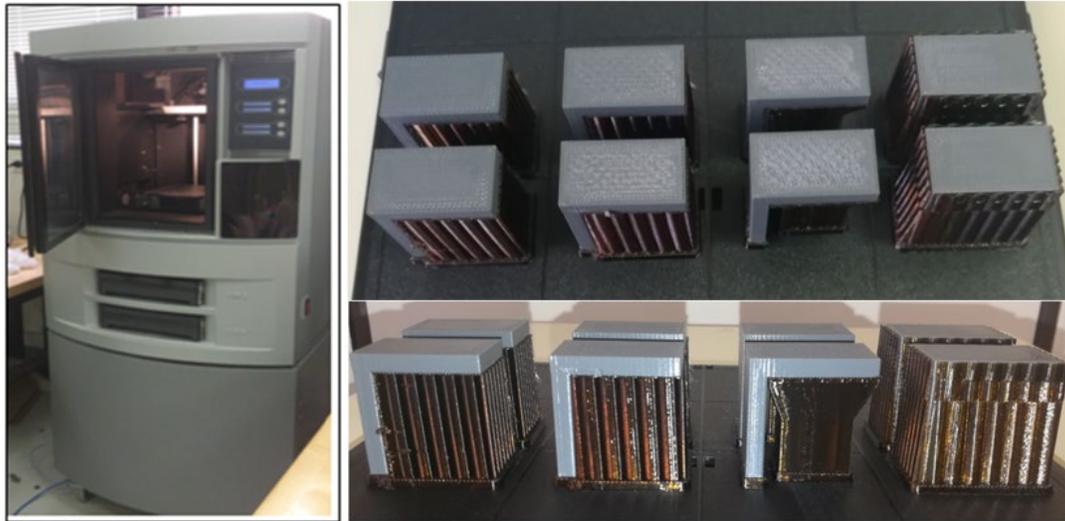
Dimension Elite FDM Machine and some fabricated specimens
